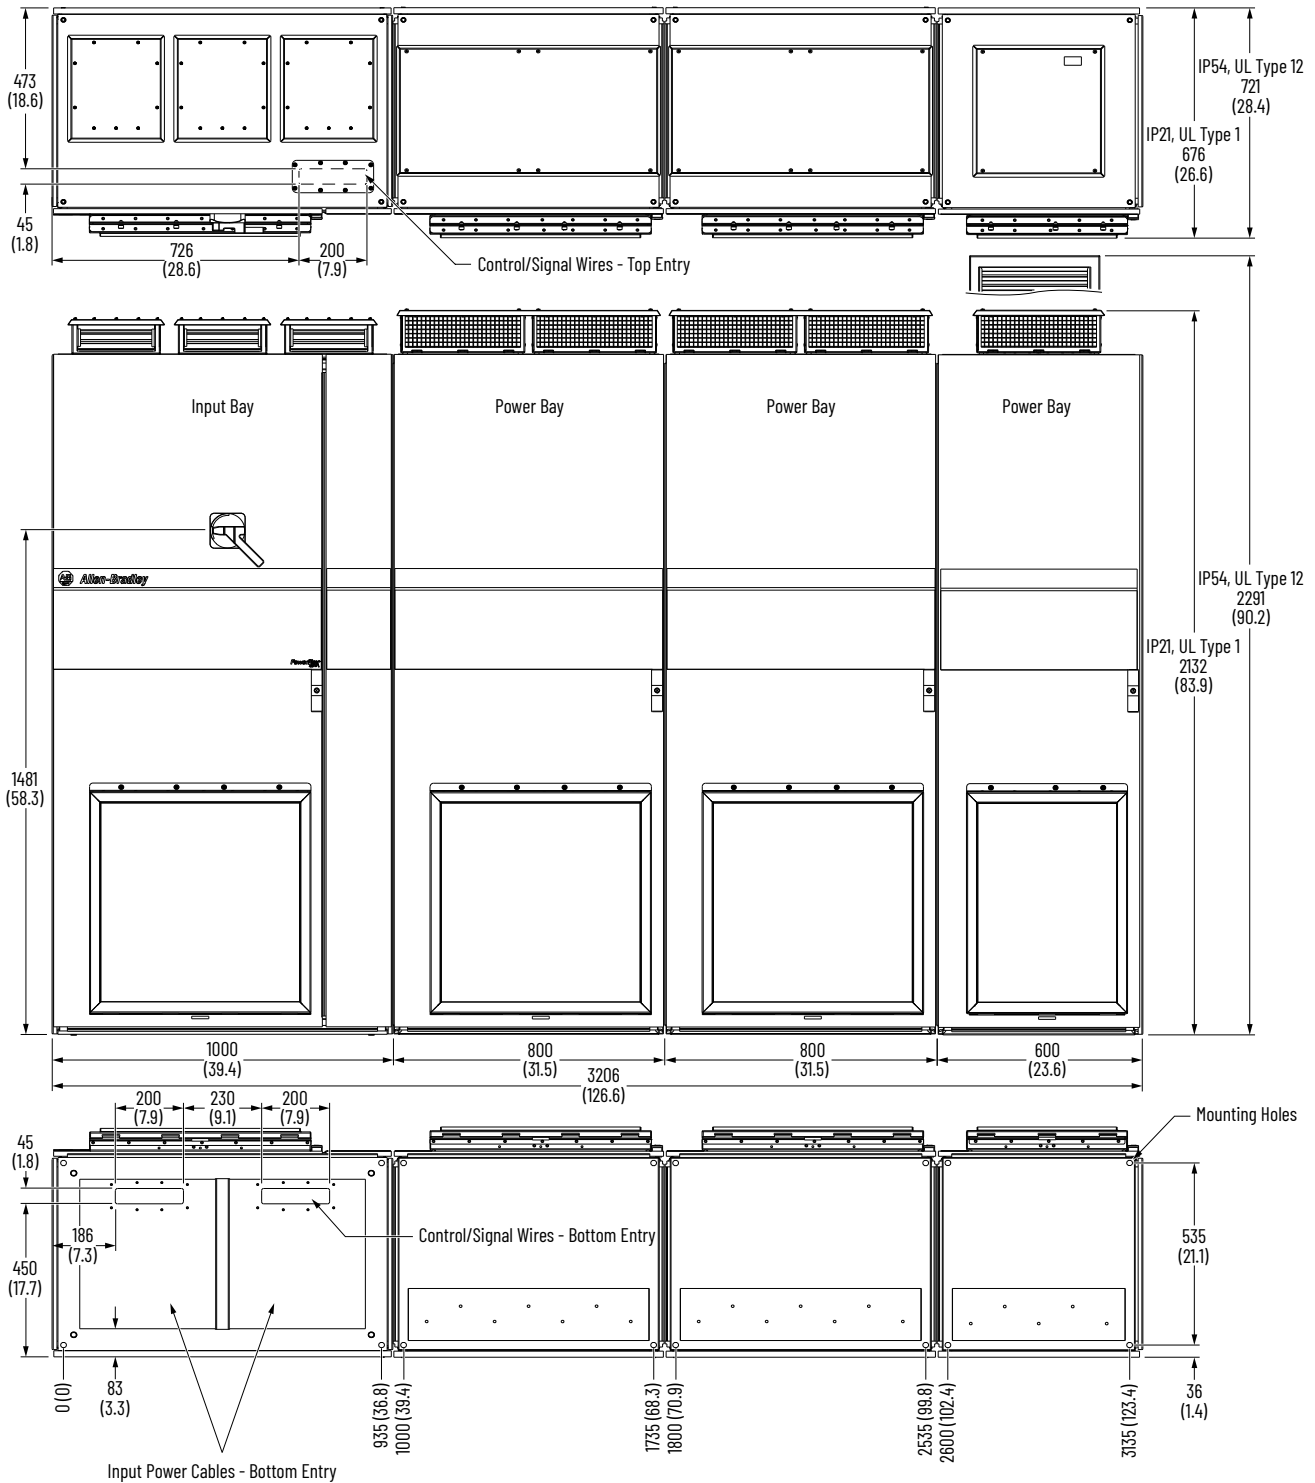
Frame 11 Bus Supplies Top, Front, and Bottom Views—Dimensions are in mm (in.)
